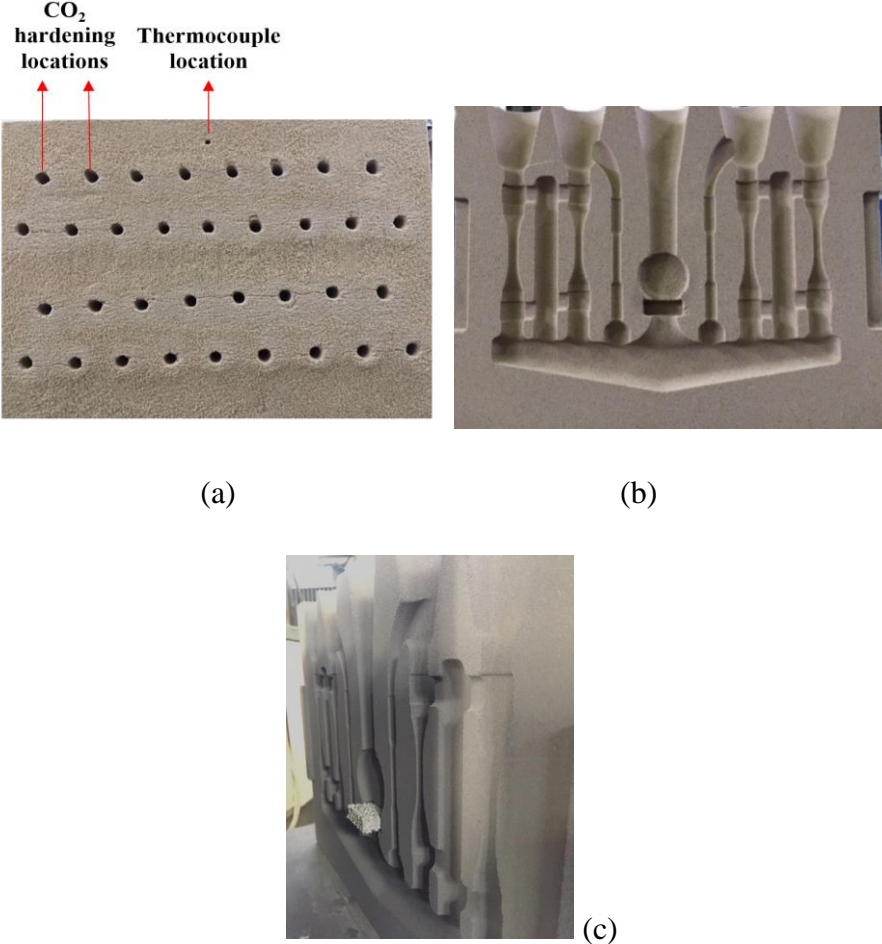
(a) Hardening method with CO₂ for sand moulding (b) half of the sand moulding after hardening (c) filter inserted mould
